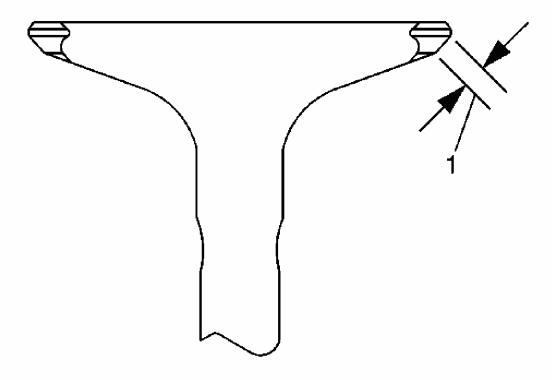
Measuring Seat Width On Valve Face Courtesy of GENERAL MOTORS CORP.
